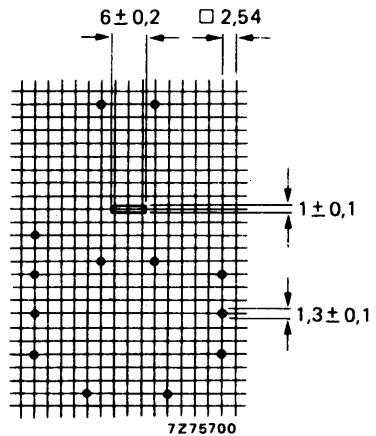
Hole pattern for mounting on a printed-wiring board (solder side).
